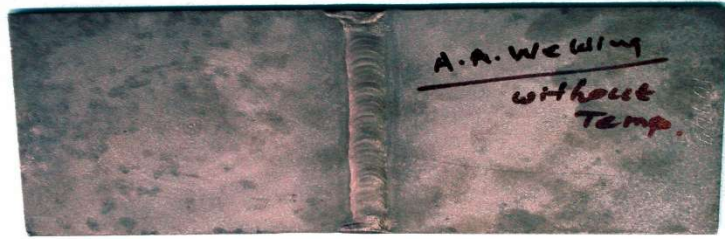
After tacking preheated (290°C for 25 min) and welding is done by GTAW (2 layer), then after welding took the part without post heat.
